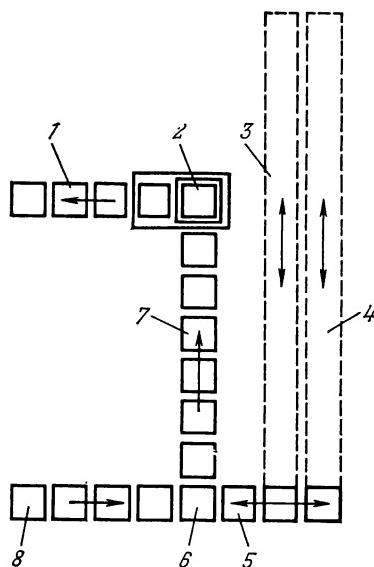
Principle of a blind-alley stockpile bank for housing-type parts
